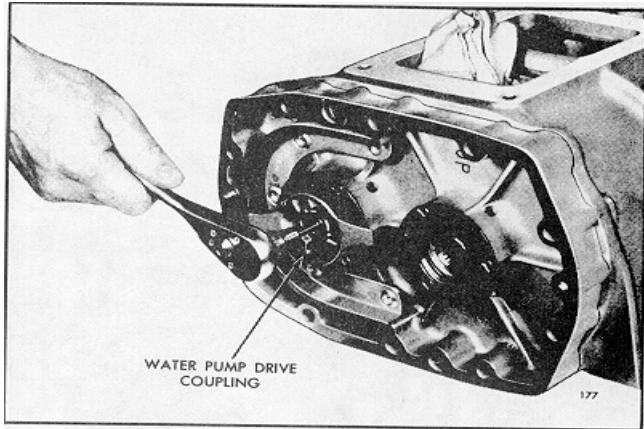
Removing Water Pump Drive Coupling Bolt from Blower Rotor Shaft
